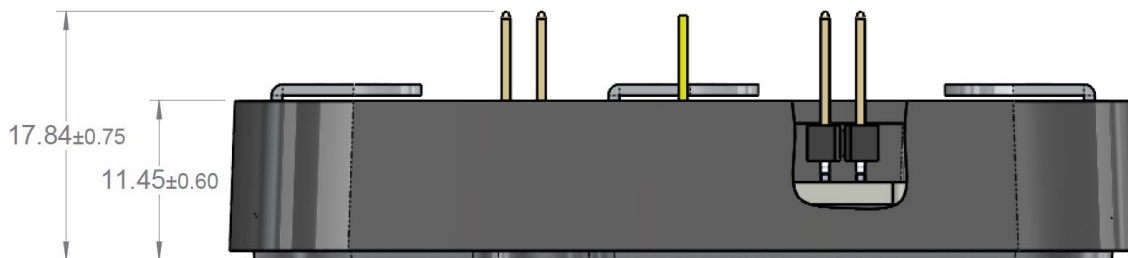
H-module cut out view with pin engagement specifications. All units are in mm.
